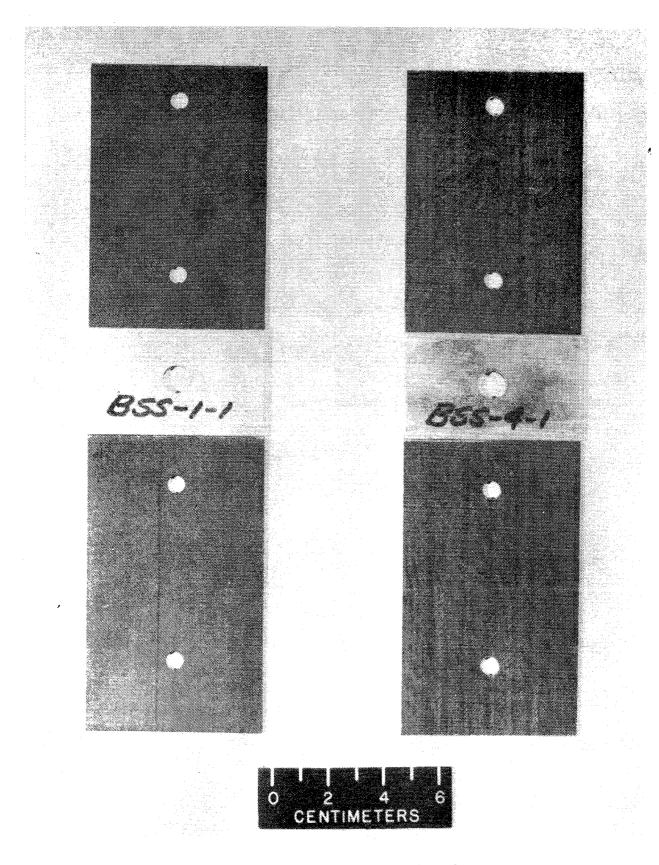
BEARING AND SHEAROUT TEST SPECIMENS
